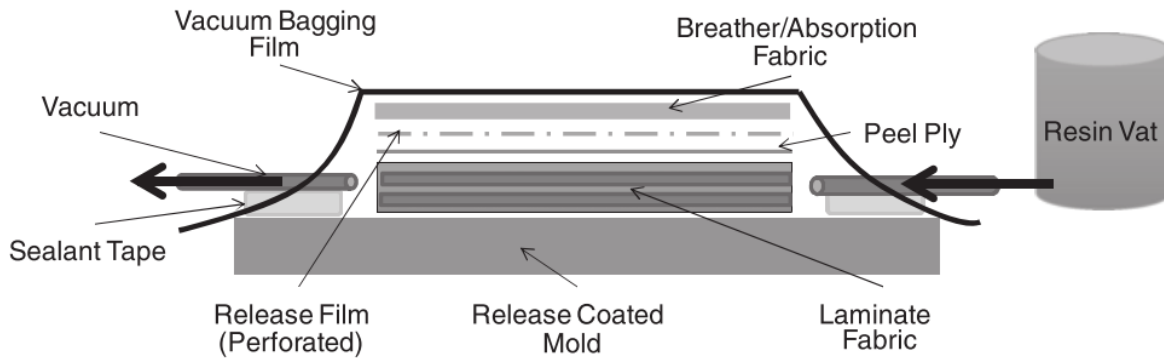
Vacuum-assisted resin transfer molding (VARTM) lay-up illustration [6].
